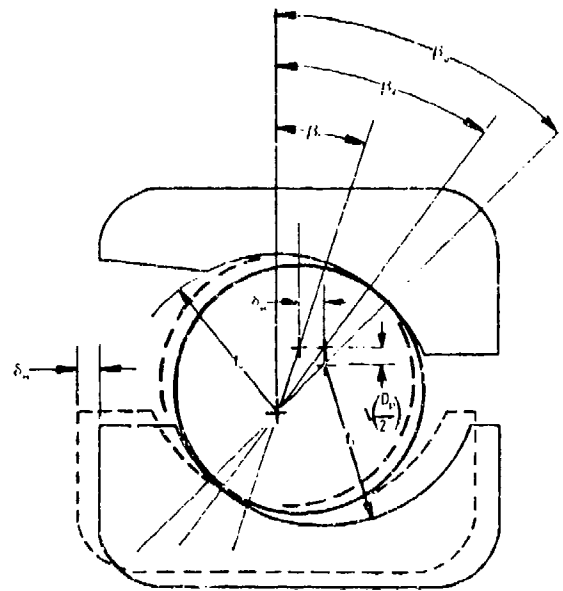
Bearing Geometry Change With Inner Ring Expansion
